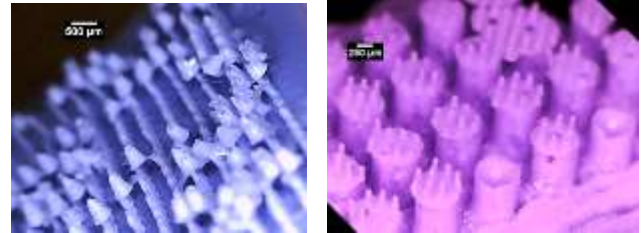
a) Mushroom head pattern using Laser cutting and engraving b) Multi-level pattern using multi-level moulding process
